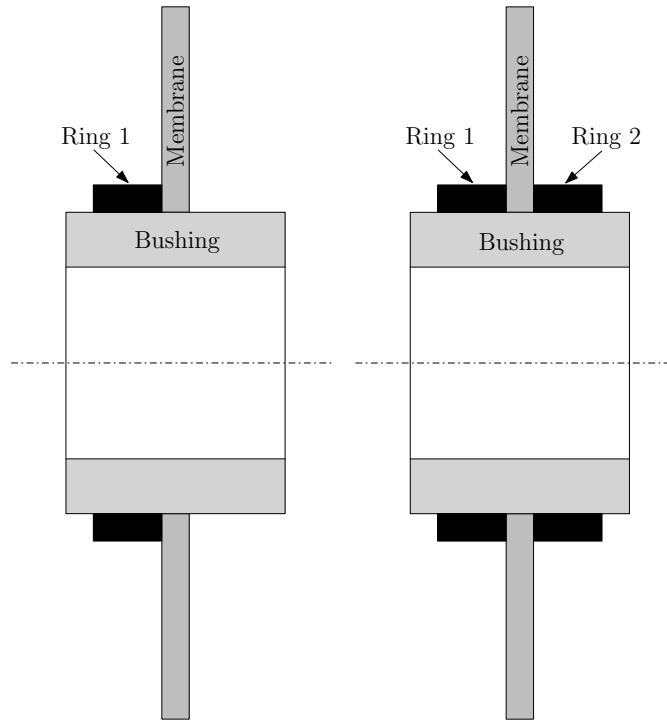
Setup for measurements with optical probes: a) Standard setup containing one ring; b) Additional target ring fitted
